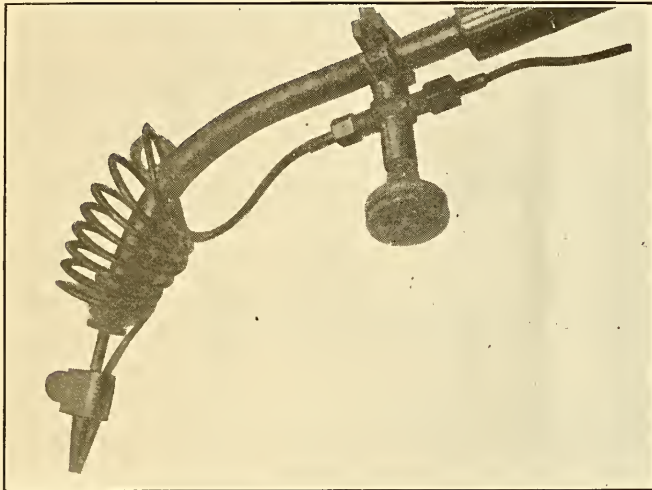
Cutting Torch Made to Preheat the Oxygen Cutting Jet.
